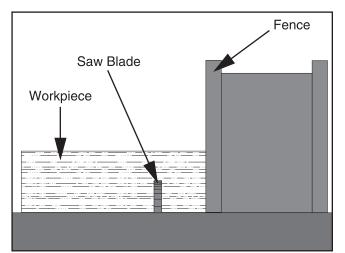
Rabbet cutting with a standard blade. G0605X/G0606X Extreme Series 12" Table Saw
